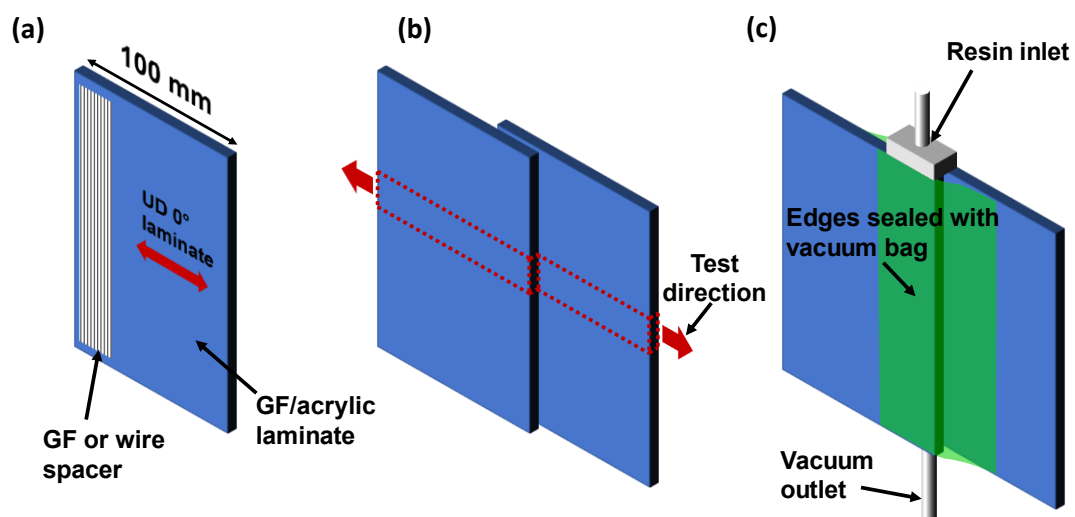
Details of the resin-welding process. (a) Glass reinforcement, or a wire spacer for adhesive and neat-resin bonds, is placed on the adherend then (b) a second adherend is placed on top—the coupon outline and test direction are highlighted—and (c) the weld region is sealed with vacuum bagging and a resin inlet and outlet.
